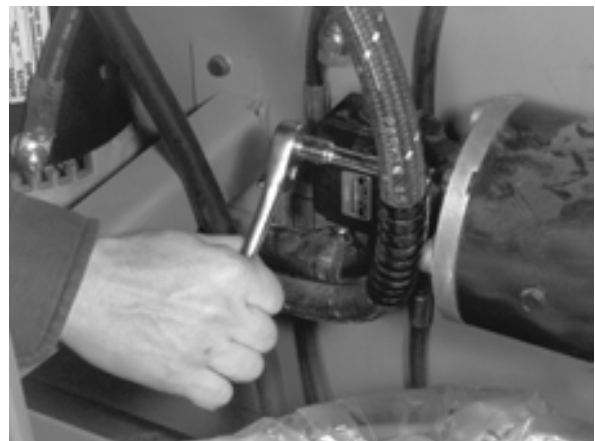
Remove the Four Screws that Secure the Pump to the Steer Motor
